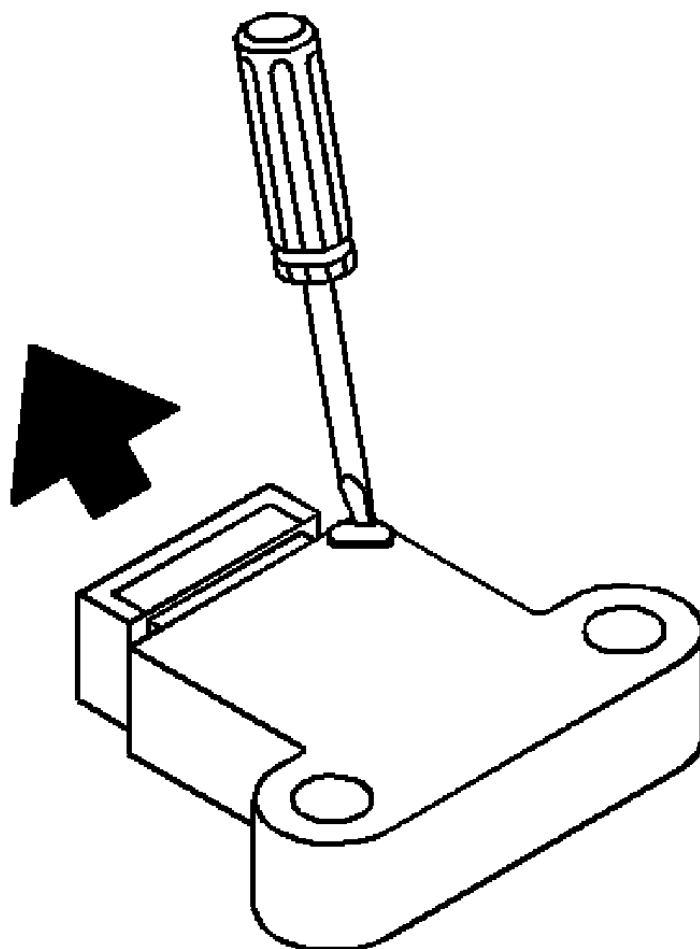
Locking Primary Camshaft Drive Chain Tensioner Shoe Into Collapsed Position
